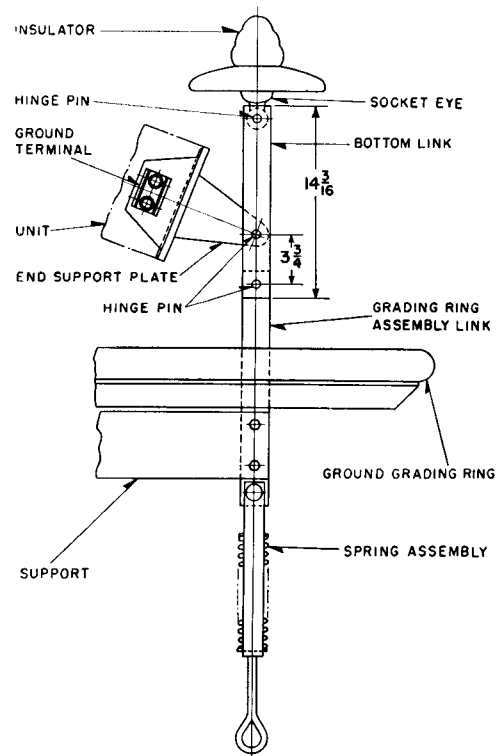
GROUND GRADING RING AND SPRING ASSEMBLY
